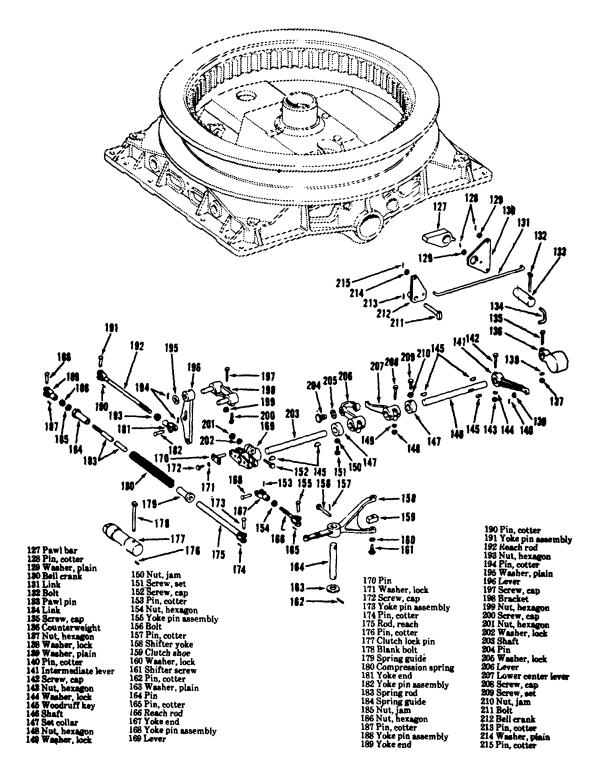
Vertical propel shaft, exploded view (sheet 3 of 3)
